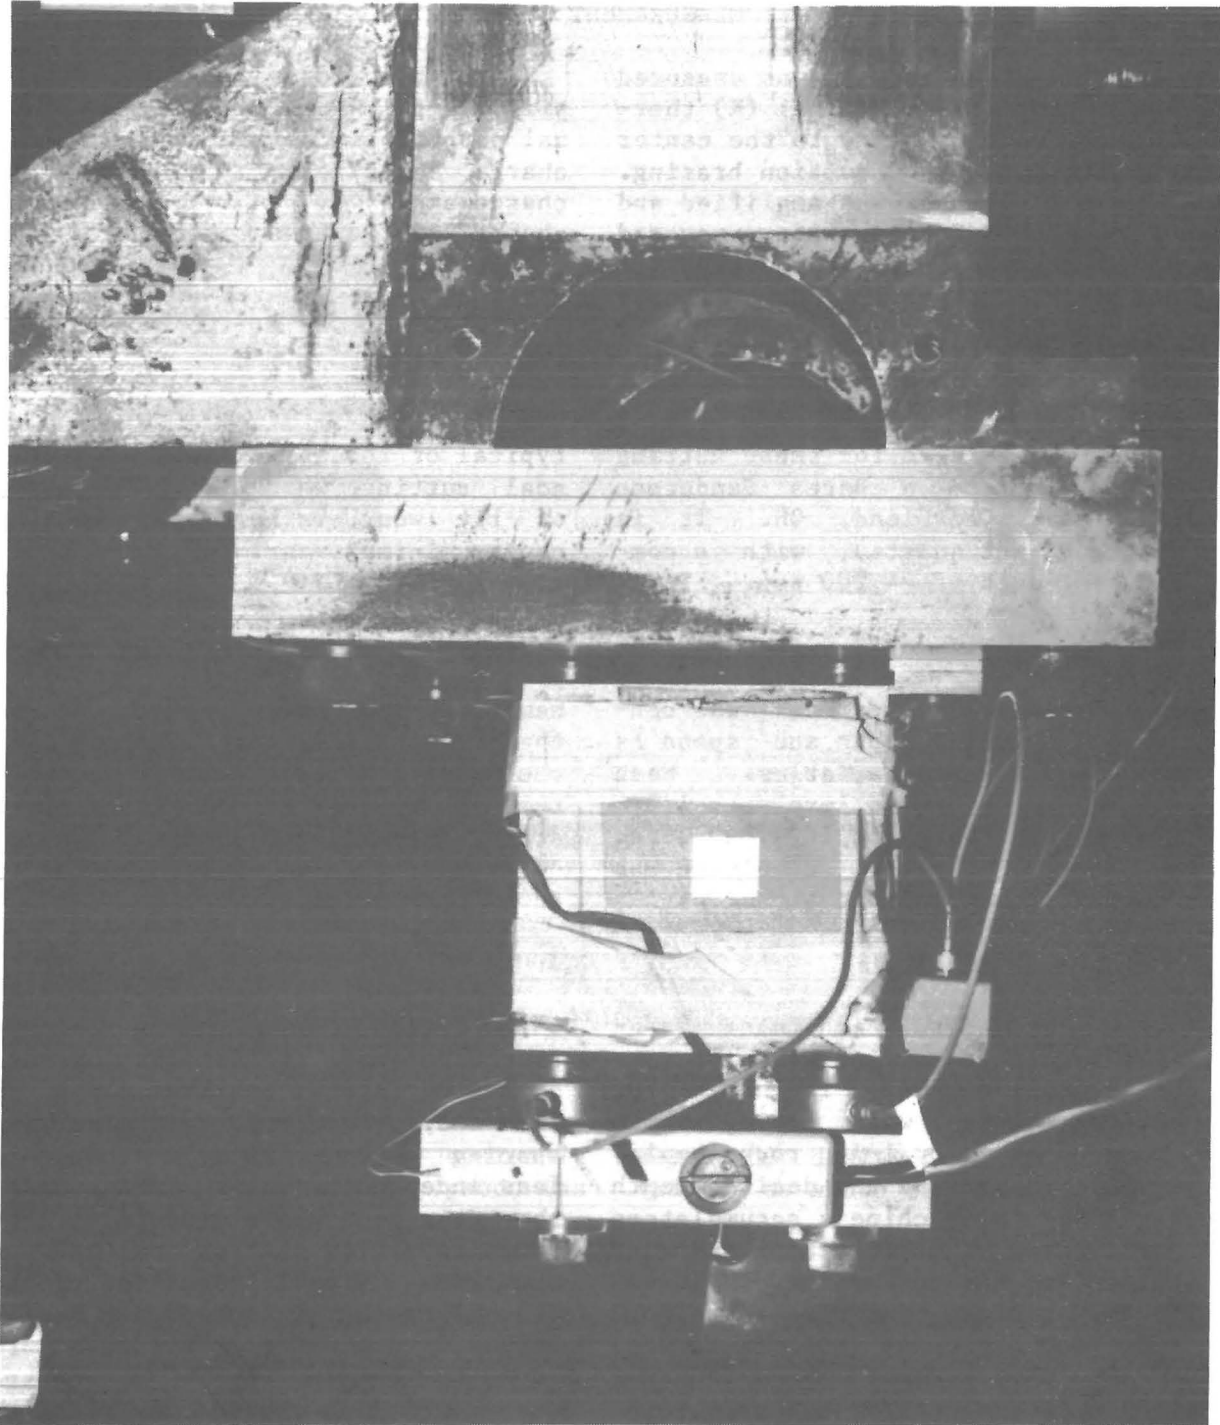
Thermocouple instrumented bit in cutting machine.
